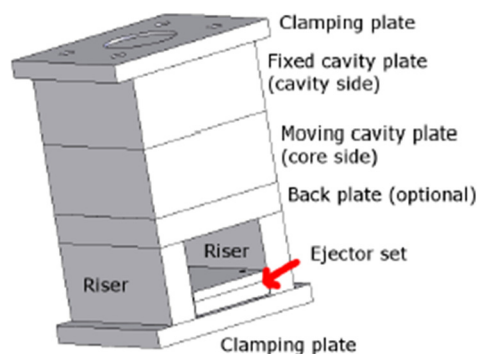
Standard Mould Schematic (DS, Standard Components, 2008)
